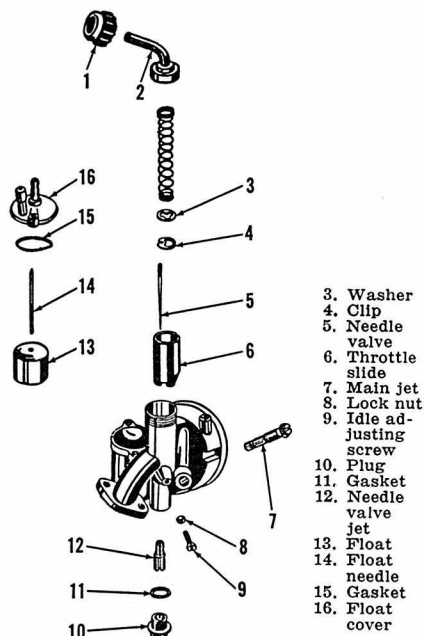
Exploded view of Bing 1/12 carburetor.
